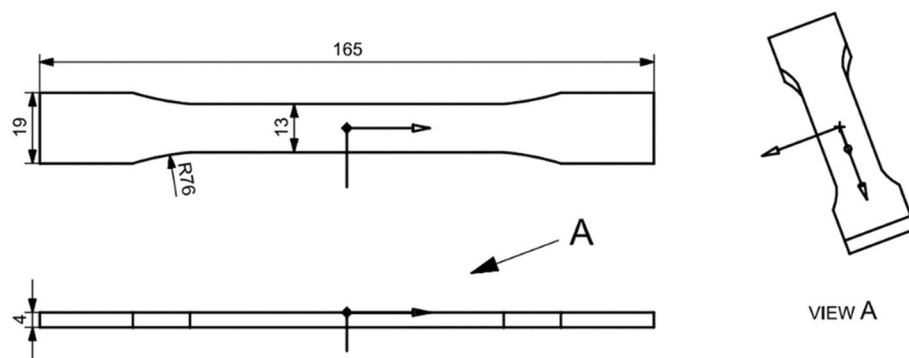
Geometrical view of tensile test sample conforming ASTM 638
